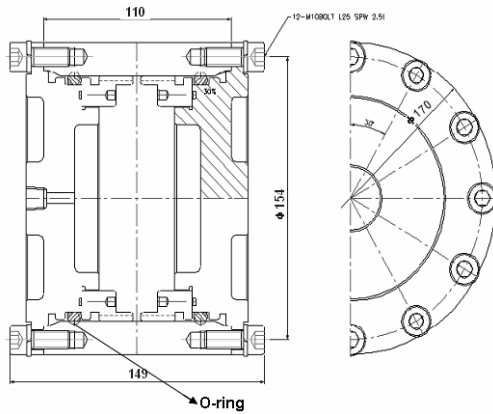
Experimental loading device for O-ring under internal pressure and uniform squeeze.
